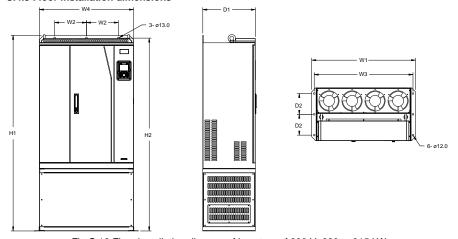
Floor installation diagram of inverters of 380 V, 220 to 315 kW
